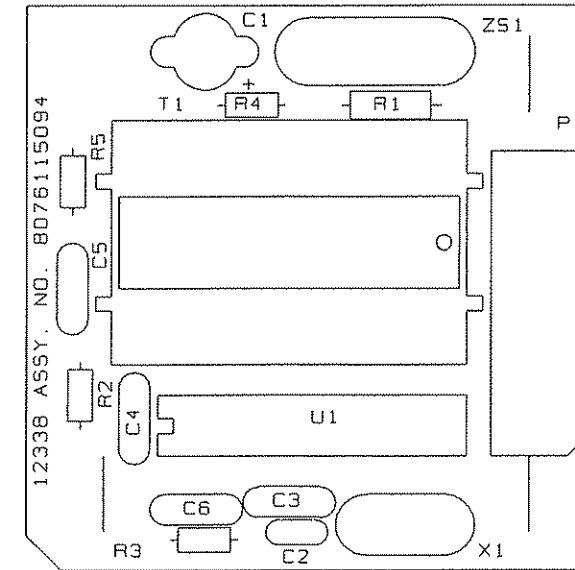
PC Assembly, I/O Board 1A2A8, page 3/3.
